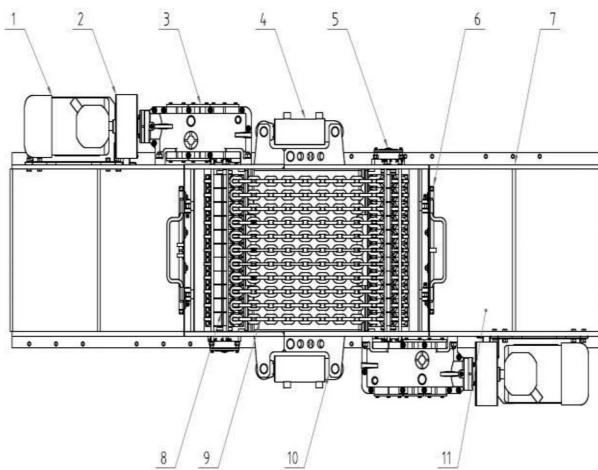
Schematic diagram of the test rig: 1 – Induction motor 22 kW, 2 – Flexible coupling, 3 – Conical-cylindrical reduction gear, 4 – Hydraulic cylinder, 5 – Axle shaft, 6 – Sprinkler system for the test chamber, 7 – Body of the test rig, 8 – Test samples, 9 – Chain, 10 – Mounting bracket of the hydraulic cylinder, 11 – Additional chamber for aggregate
